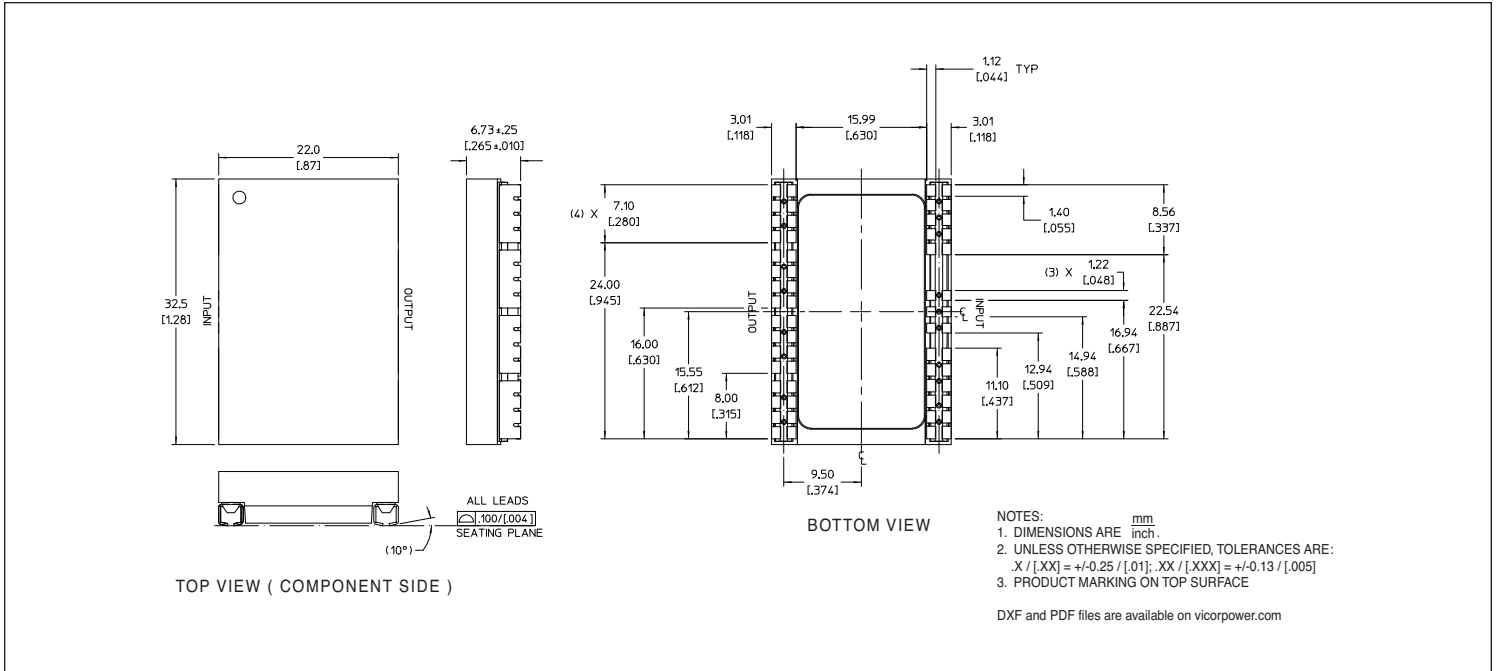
BCM J-Lead mechanical outline; Onboard mounting
